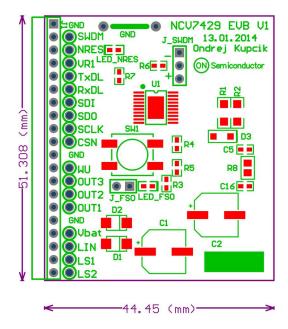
NCV7429 EVB PCB Top Assembly Drawing
